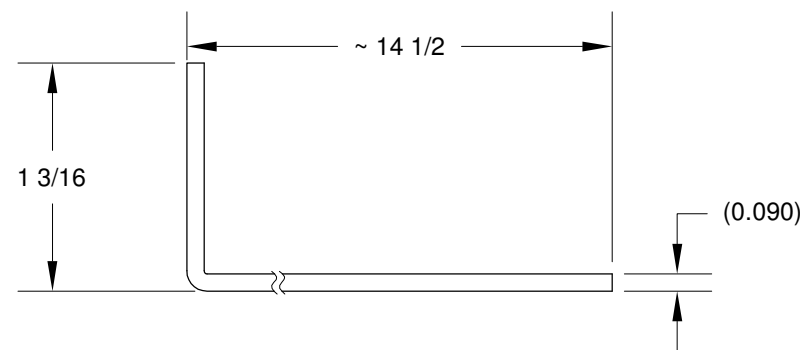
TRIMMING THE COWL HINGE PINS (LEFT SHOWN)
